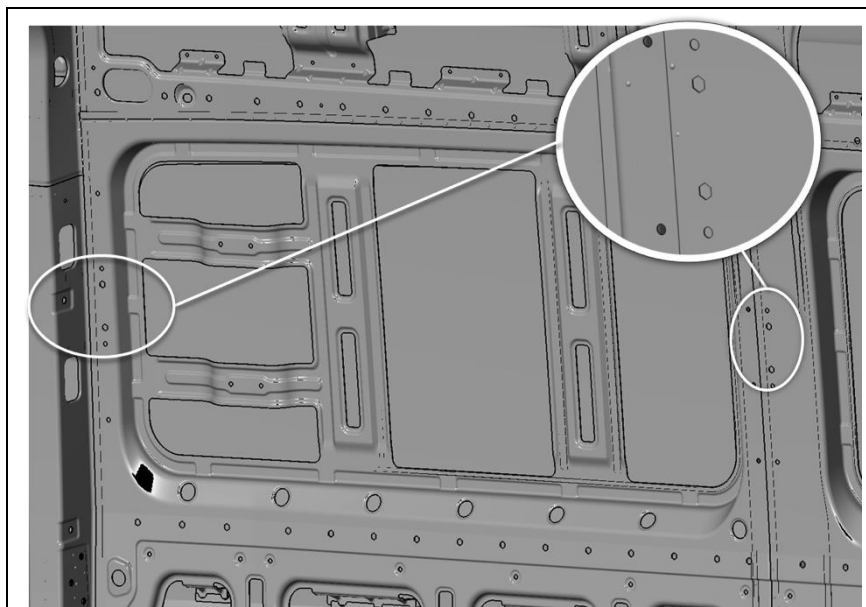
Preparation for shelving on vehicle body (sidewall), example: airliner rails installed in the sidewall
